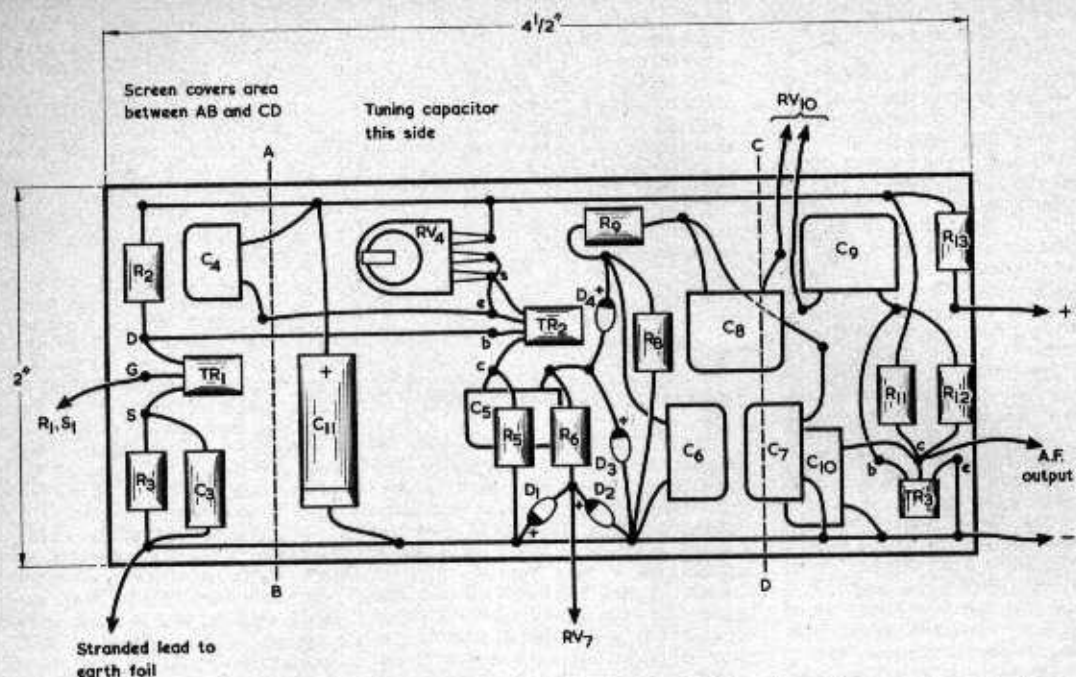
Layout of the components on the homodyne receiver board. C12 is omitted in this version. The board layout is reproduced full size here, and the diagram may be traced
